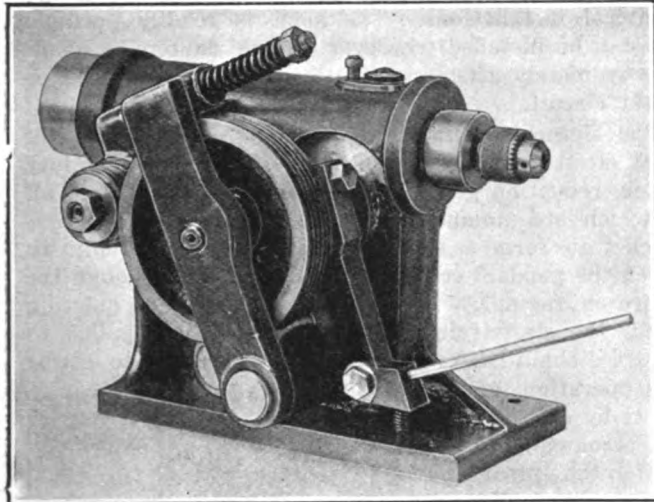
KINGSBURY NO. 8 AUTOMATIC DRILLING HEAD
